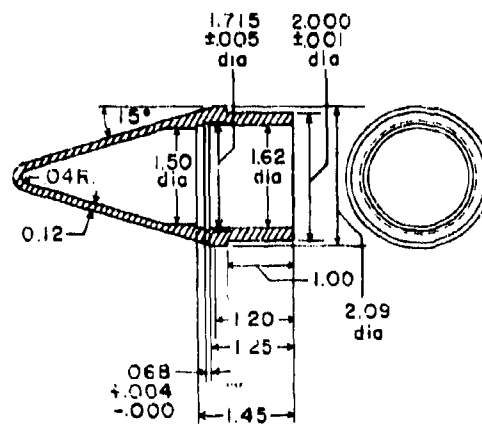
57-Millimeter Rain Erosion Test Specimen
